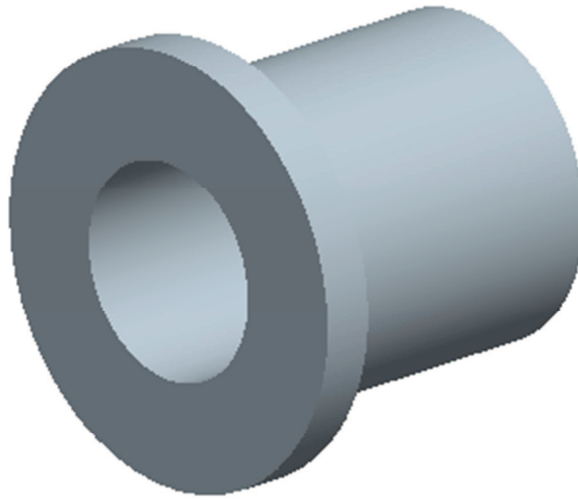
PTFE/Oil-Lubricated SAE Bronze Flanged Sleeve Bearings distributed by McMaster-Carr ^[4]. 24 of these will be used in the six-bar linkage design of Hexcavator.
